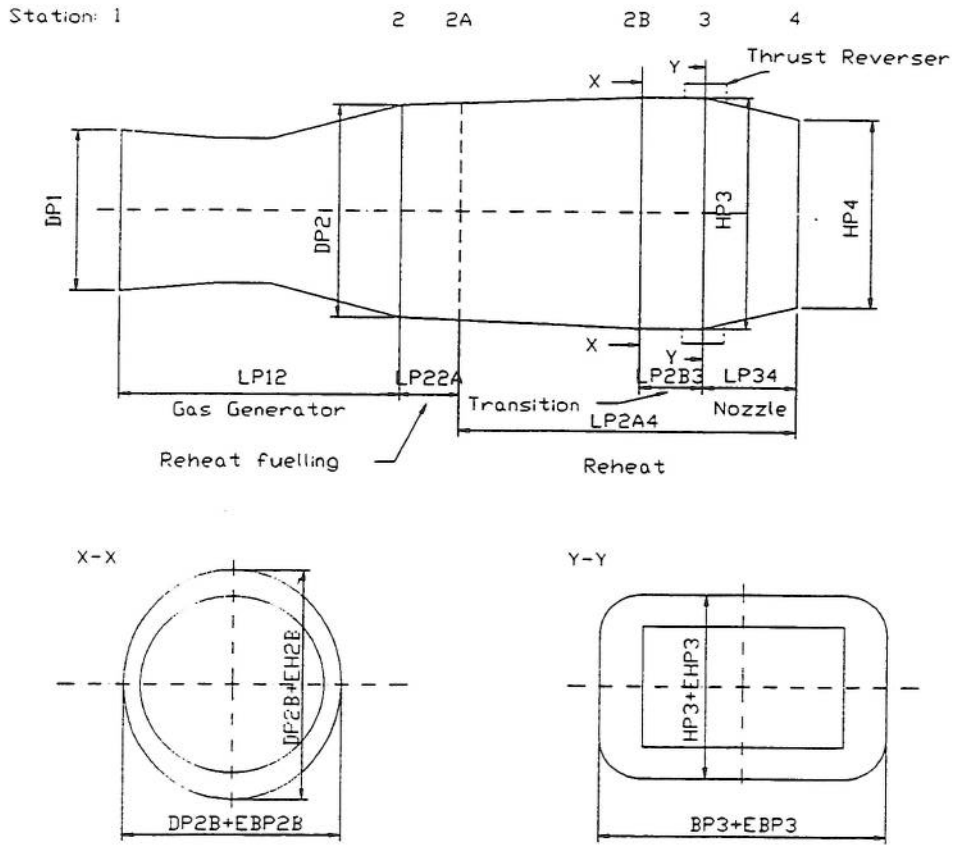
Engine Geometry with Two-Dimensional Nozzles
